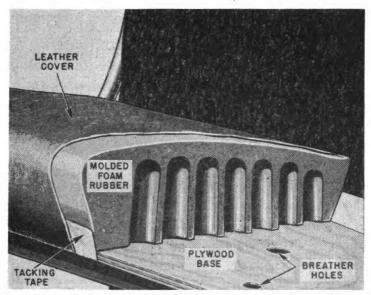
Cross section of molded, full depth, foam-rubber seat.
